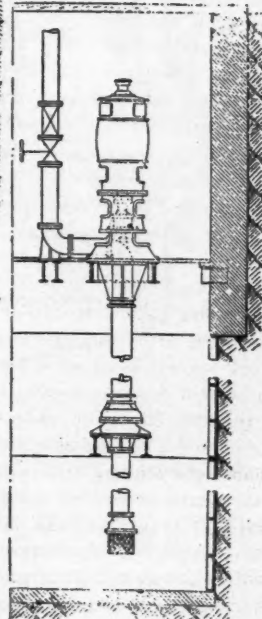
SUBMERGED ELECTRIC PUMP, WITH SHAFT MOUNTED IN STANDPIPE.
